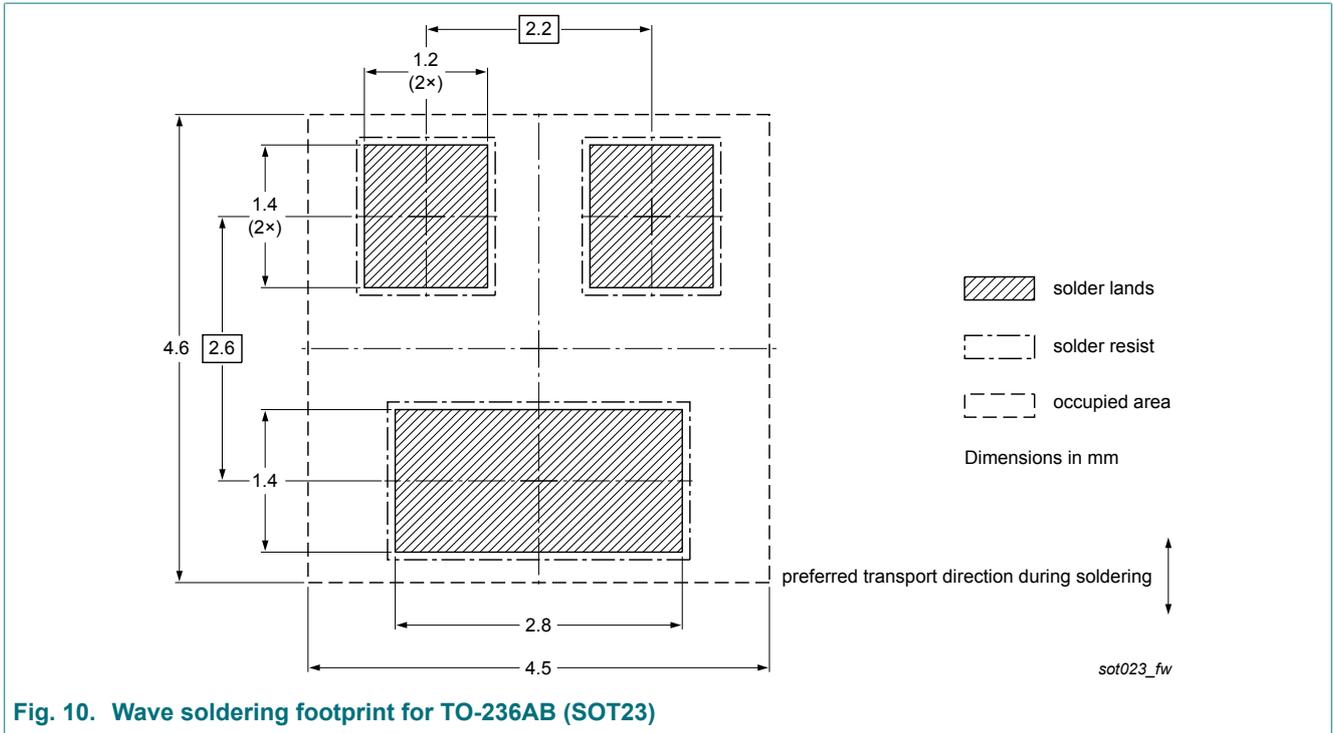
Wave soldering footprint for TO-236AB (SOT23)
